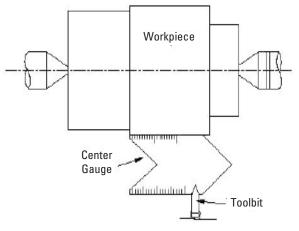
Using a center gauge, set the threading tool at exactly dead center on the workpiece
